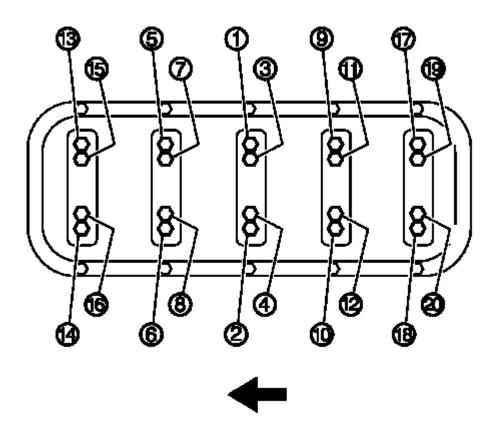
View Of Upper & Lower Crankcase W/Bolts Courtesy of GENERAL MOTORS CORP.
